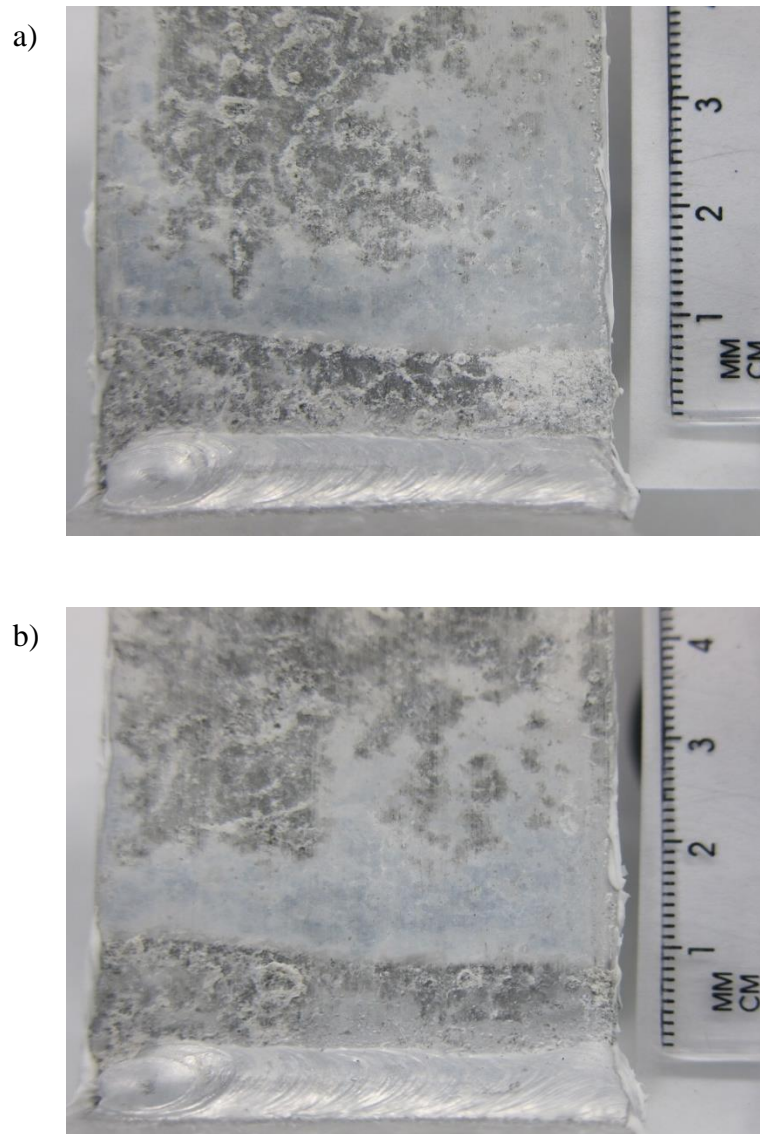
Close-up images of duplicate samples of T-joint welded configuration F3 (ER5356/AA7108/L) in the as-welded T6+PB condition.
